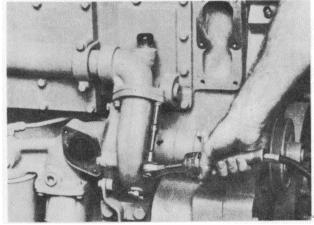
B-10. Remove the Water Pump From the Cooler Transfer Tube
